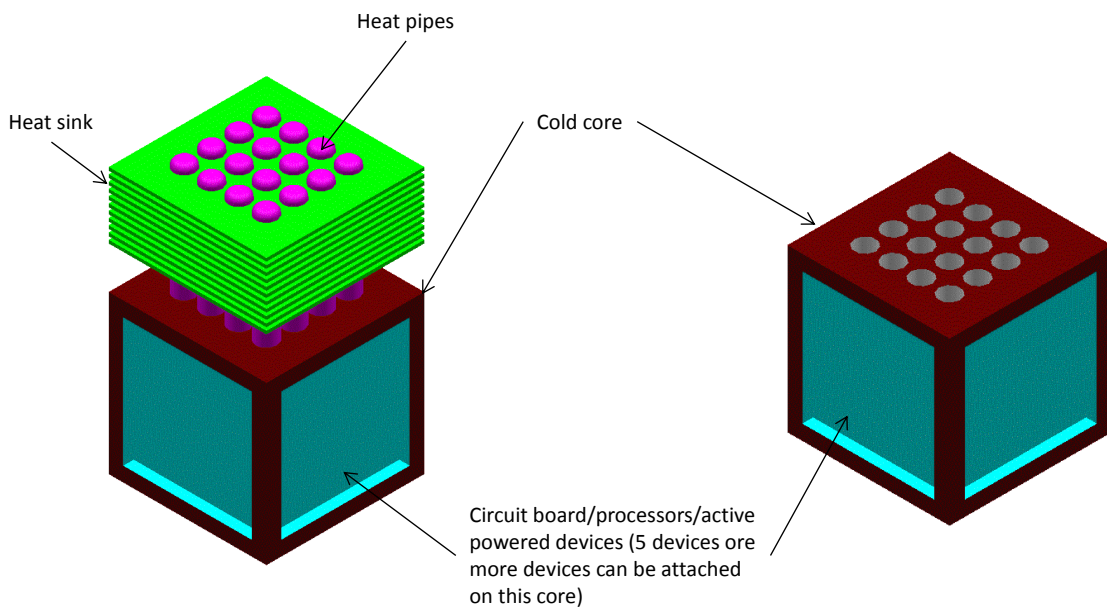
3D-IC/3D-SiP packaging with single cold core for using integrated heat pipes
